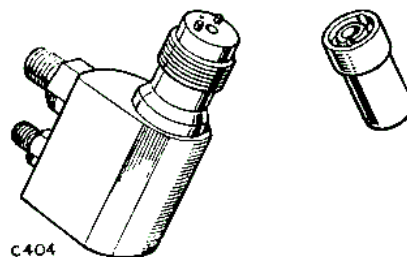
Injection nozzle assembly lapped pressure faces.
